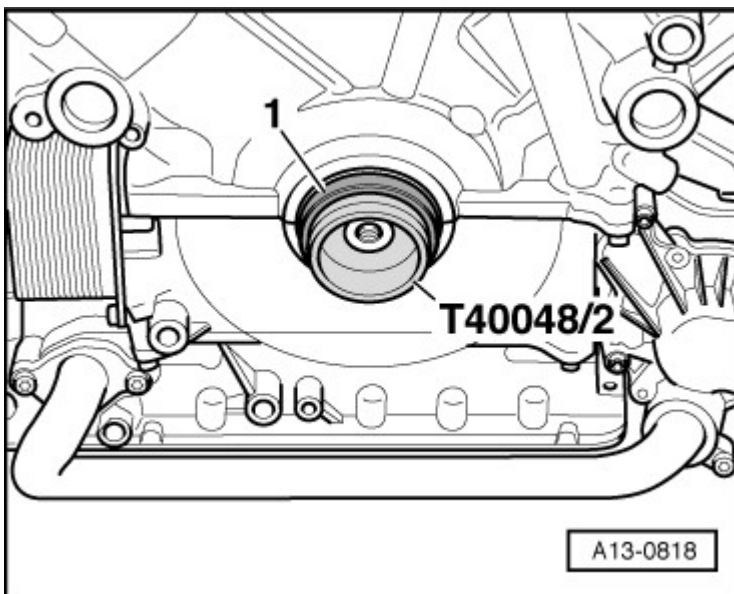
Placing Pull Sleeve T40048/2 On Crankshaft And Sliding Seal Into Sealing Surface On Engine
